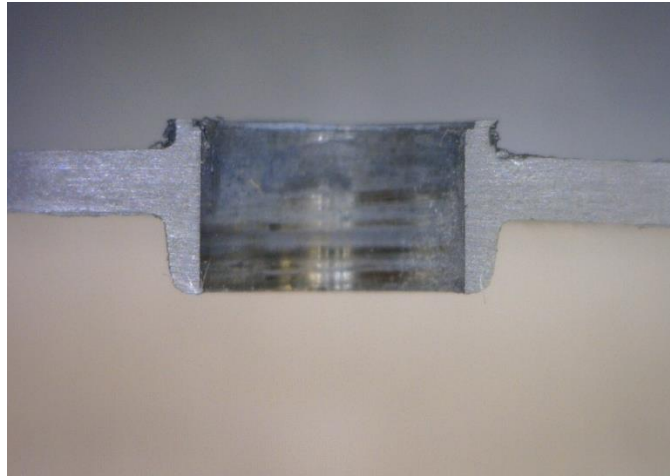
The upper sheet of free space friction drilling double 1.25 mm sheet metals at 3000 rpm with 6.35 cm/min.
